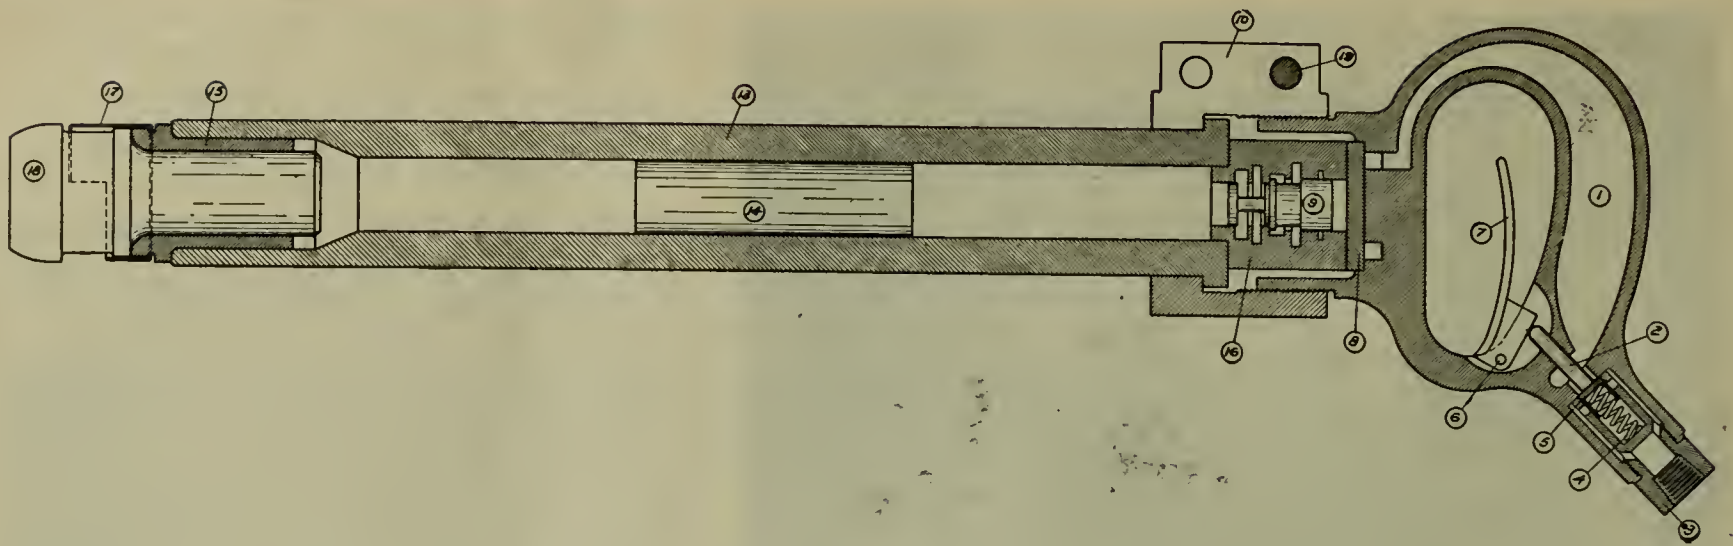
PNEUMATIC HAMMER MADE BY CLEVELAND PNEUMATIC TOOL CO.
